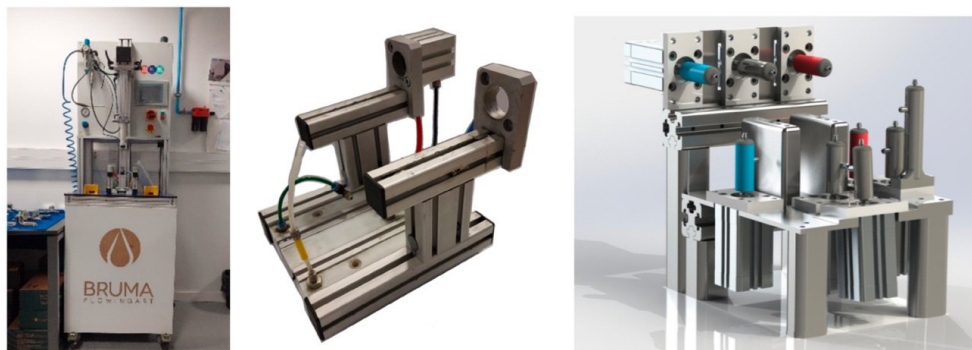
3D Image with the proposed “one piece flow” assembly line, in front of the operator is the section for quality testing using compressed air.
